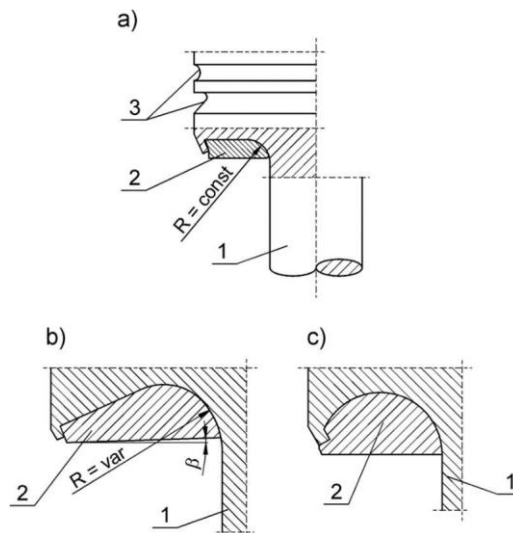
Modification of the construction of the shaft of mining machines conical picks with adapter rings fixed by rolling the device from Fig. 6: a) adapter ring with constant radius $R=const$, b) adapter ring with variable radius $R=var$ increasing towards the shank and with a bevel at an angle β that facilitates the removal of dust and wear products from the friction area of the shoulder against the sleeve or pick holder, c) the half-toroidal adapter ring: 1 – shank of the pick, 2 – adapter ring, 3 – relief notches reducing stress concentration in the transition zone of the head of the pick into the shoulder
